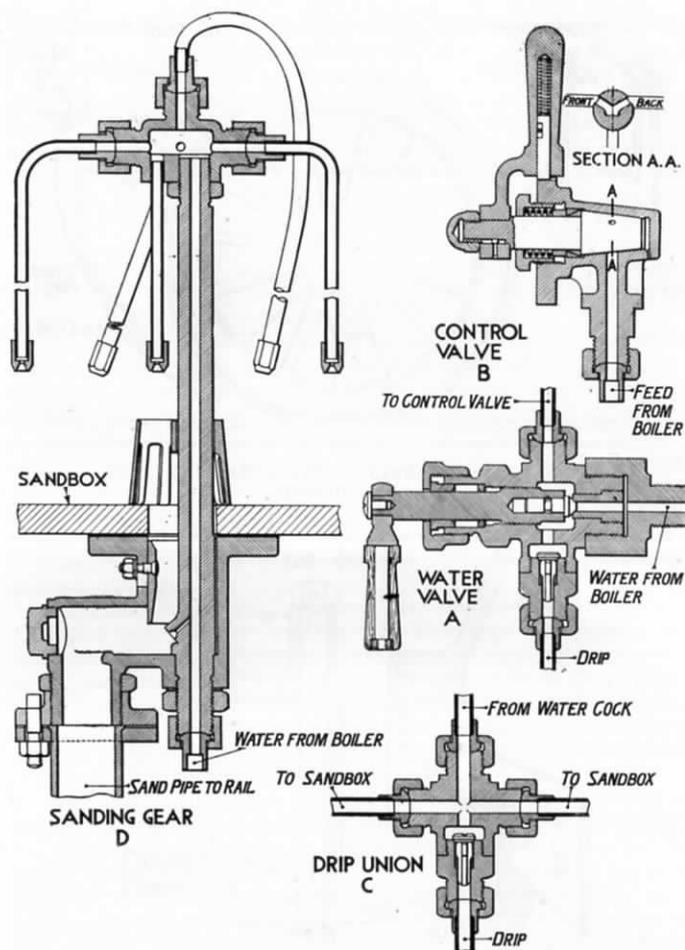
DETAILS OF LAMBERT WET SANDING GEAR.
